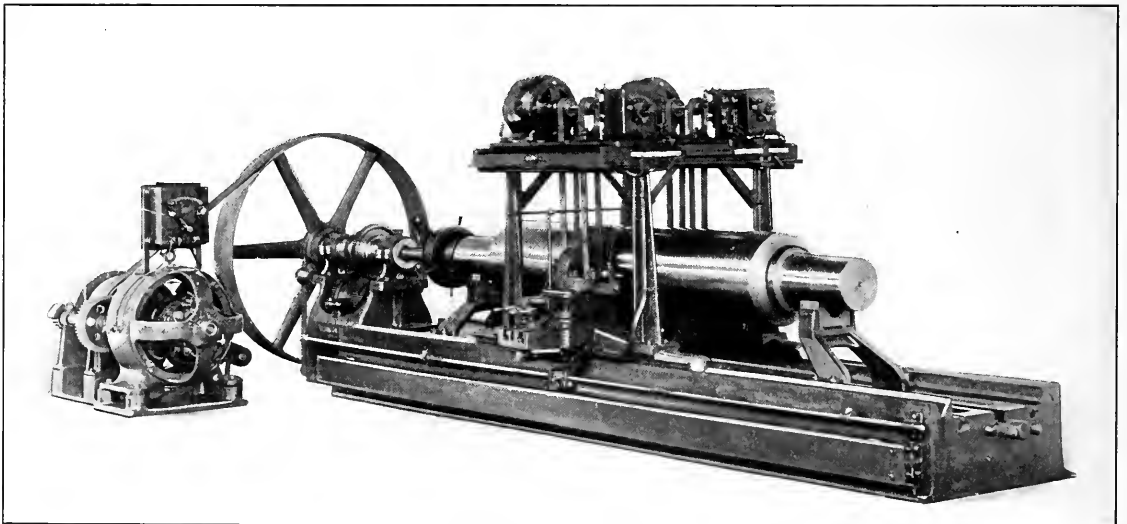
Lobdell electrically driven Roll Grinding Machine
